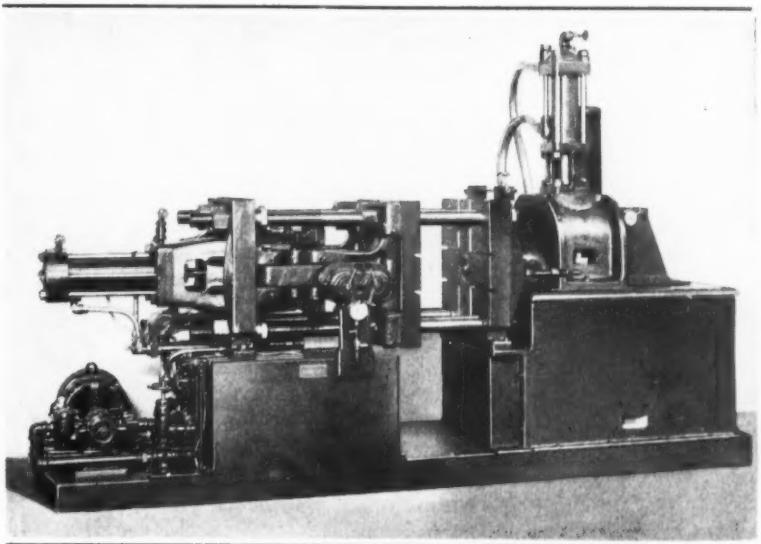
Zinc Die-casting Machine of Recent Reed-Prentice Design
